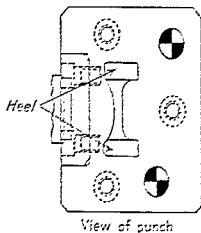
Mounting of a sectional punch for grinding adjustment. (Harig Mfg. Corp.)
